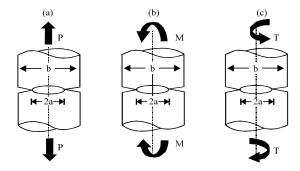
Cracked shaft subjected to (a) axial load (b) bending load (c) torsional load
